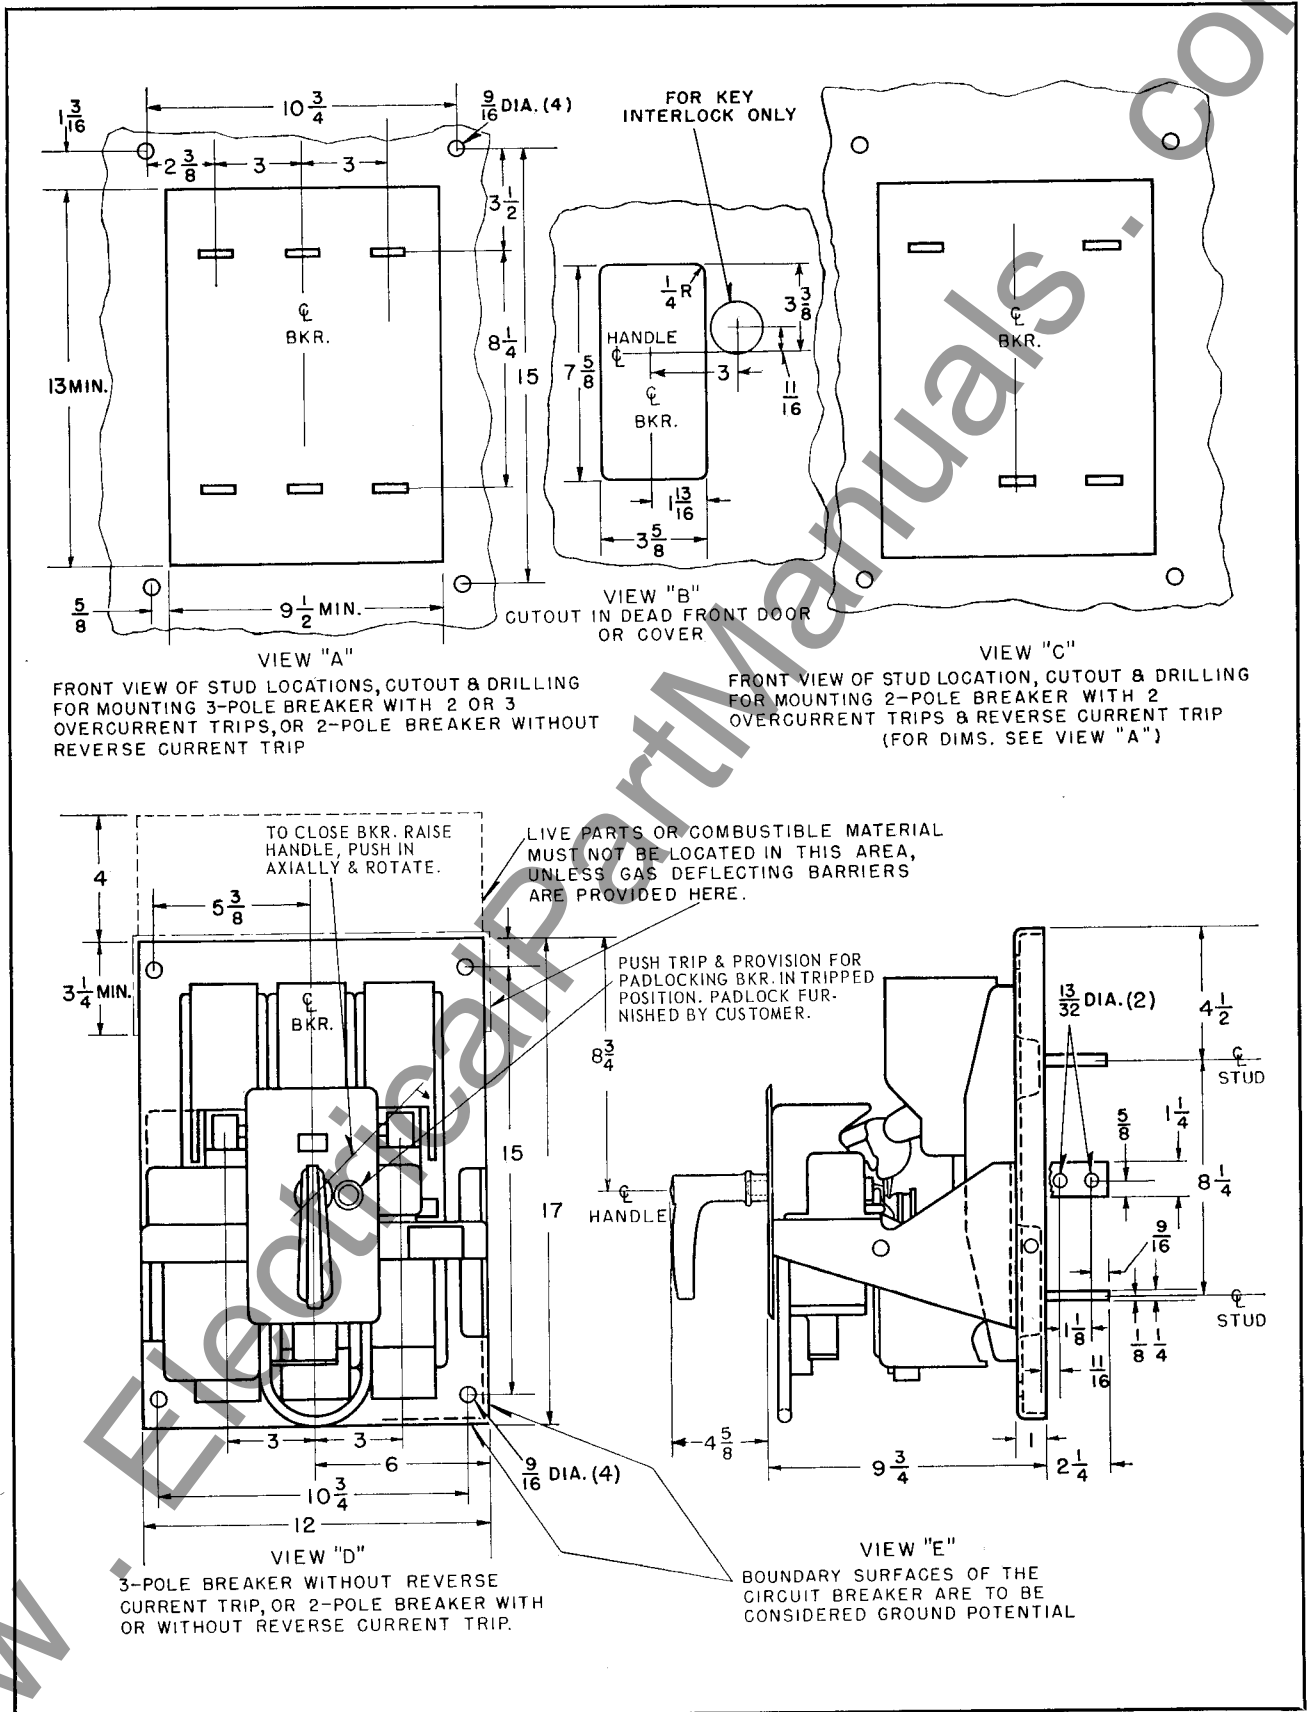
DB-15 Outline Dimensions and Mounting Details
